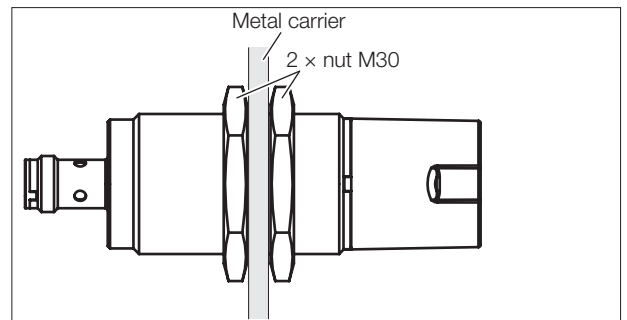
Mounting example, clamp mounting with metal bracket and 2 x nut M30
